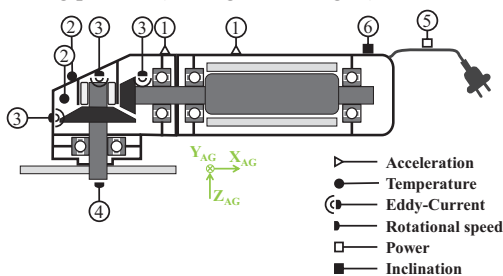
Sensor types and measuring points of the sensor equipped angle grinder.
